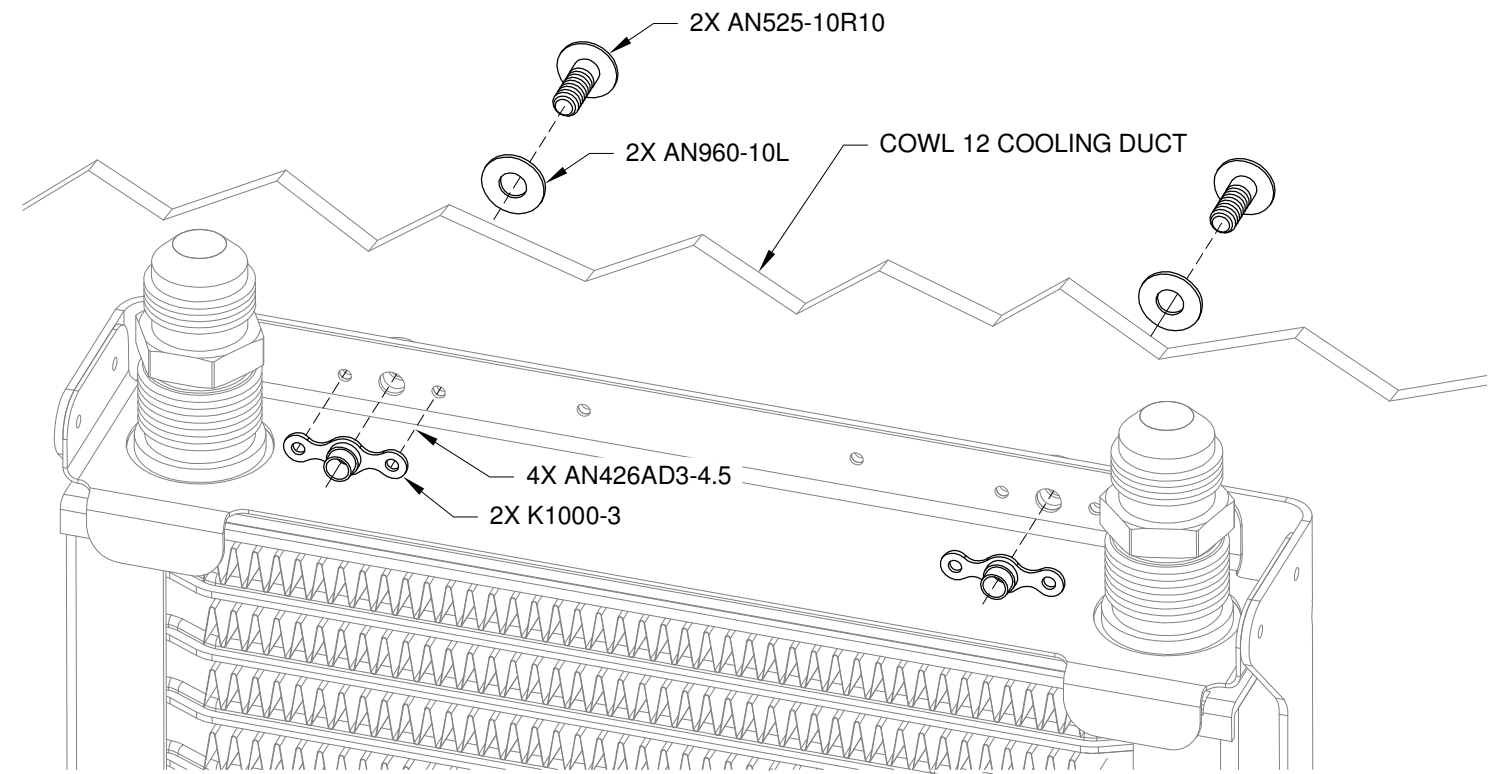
INSTALLING THE OIL COOLER ASSEMBLY
